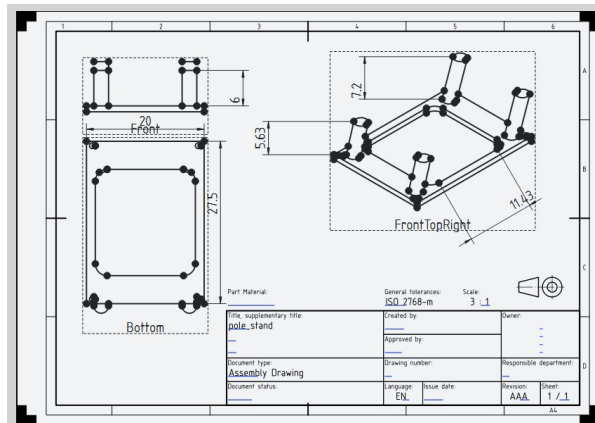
Drawing of Support Poles(Produced using FreeCADweb)
